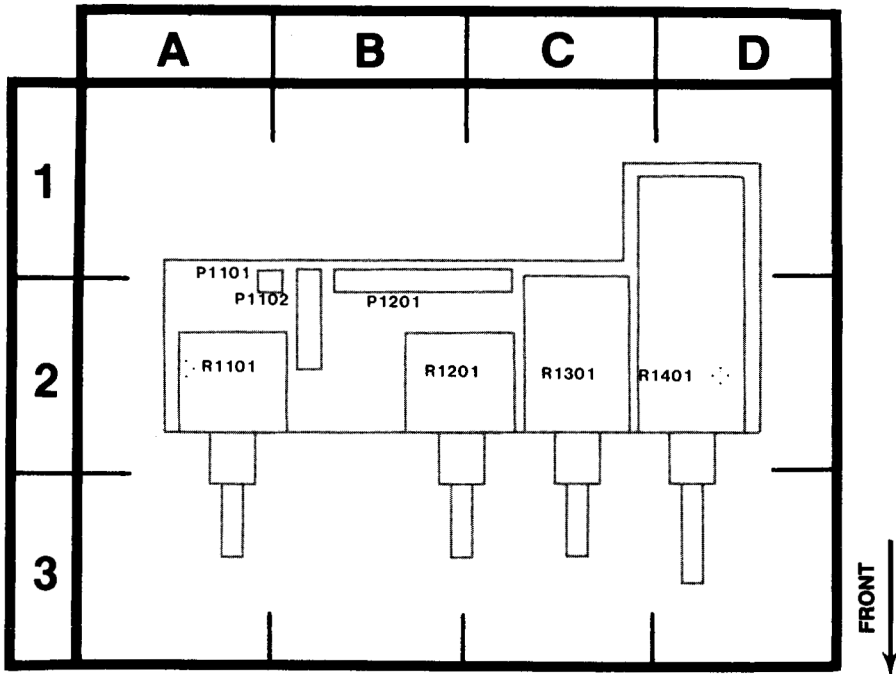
A17-Intensity Control Circuit Board Assembly.
